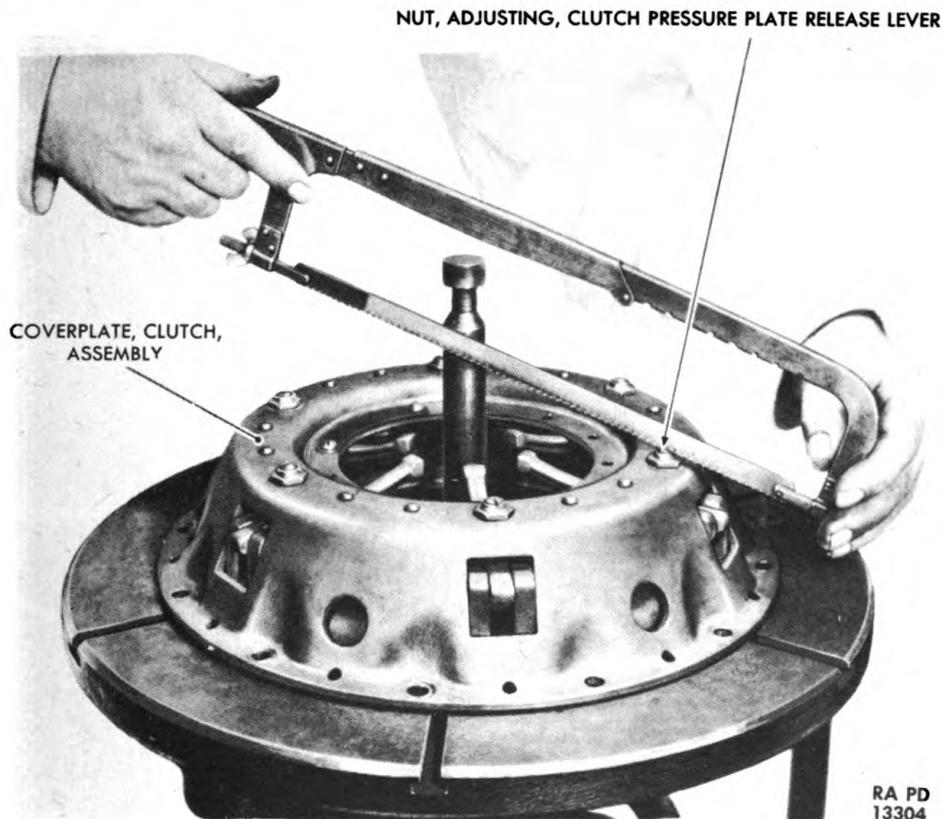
Clutch Lever Adjusting Nut Bur Removal
